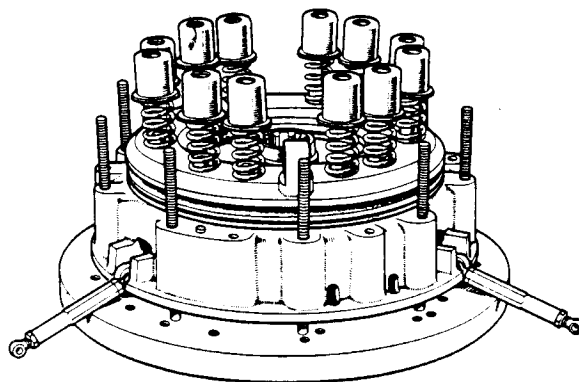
ASSEMBLING TRANSMISSION CLUTCH
